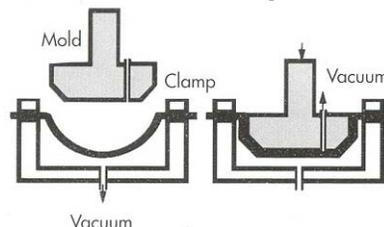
Vacuum. Forming With Plug Assist Female Mold
